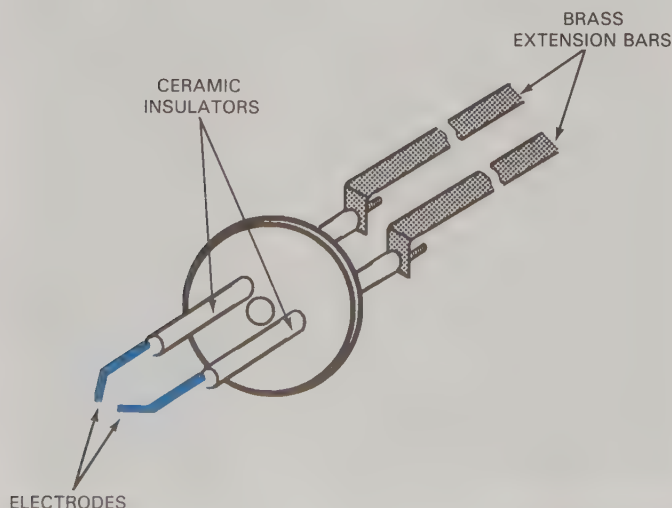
Typical electrode assembly for an oil-fueled furnace.
